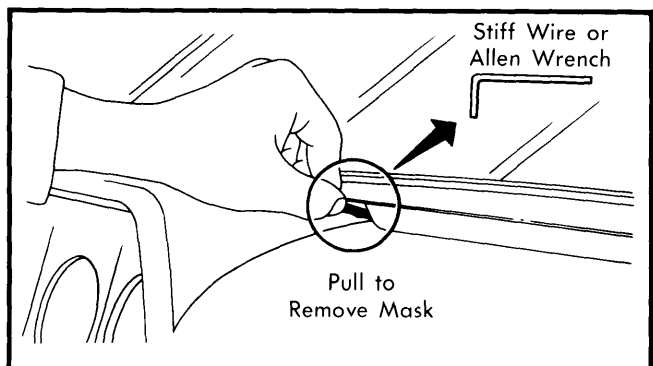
Inserting Wire to Remove Instrument Panel Mask on 310
